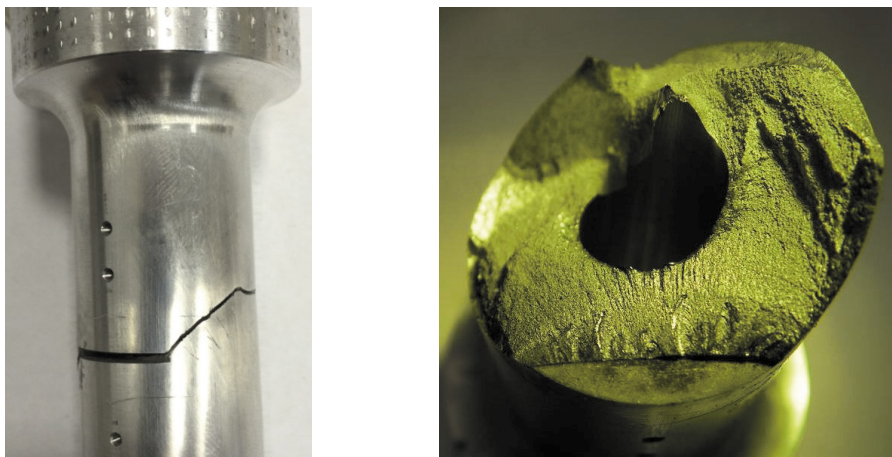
Crack surface of specimen undergoing tension-torsion combined load.
